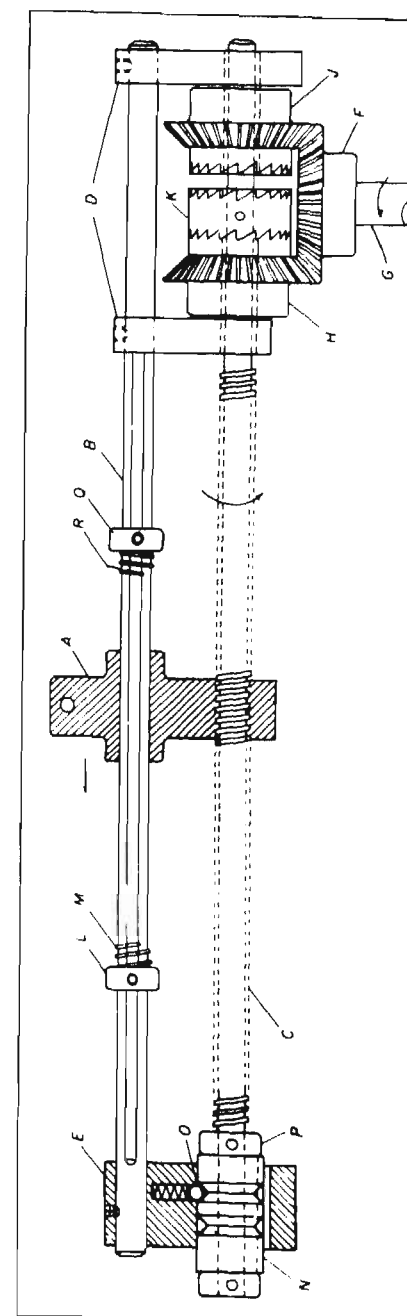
A reciprocating, traversing arrangement having an adjustable stroke for guiding wire onto spools of various widths.
